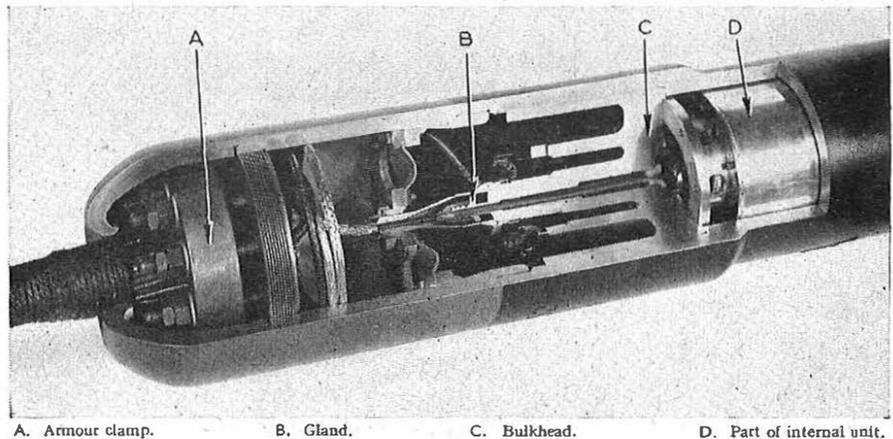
DETAILS OF HOUSING CONSTRUCTION.
